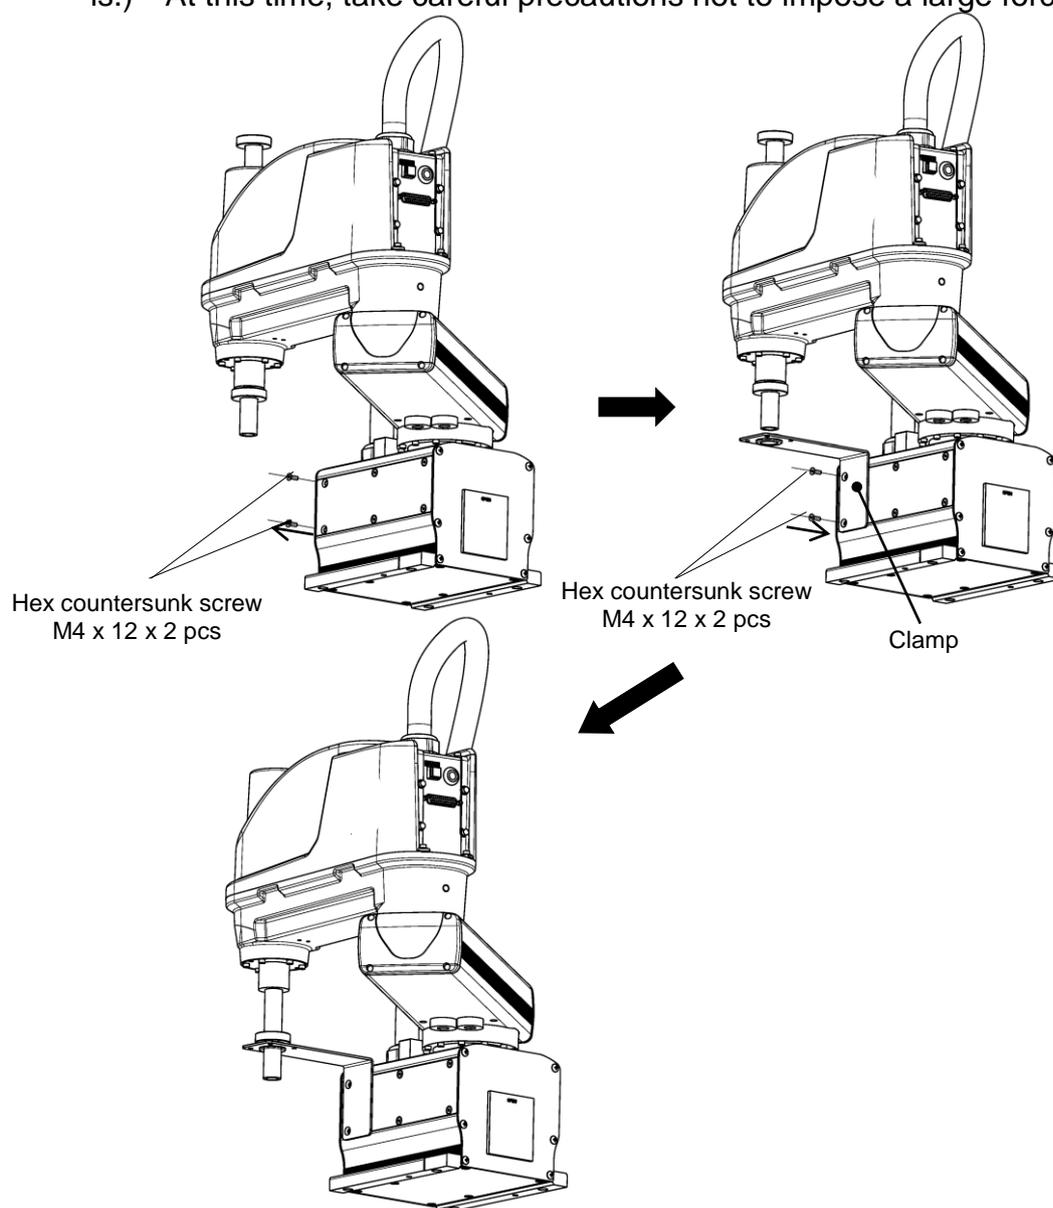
Attaching the clamp (KHL-500/KHL-600/KHL-700)
